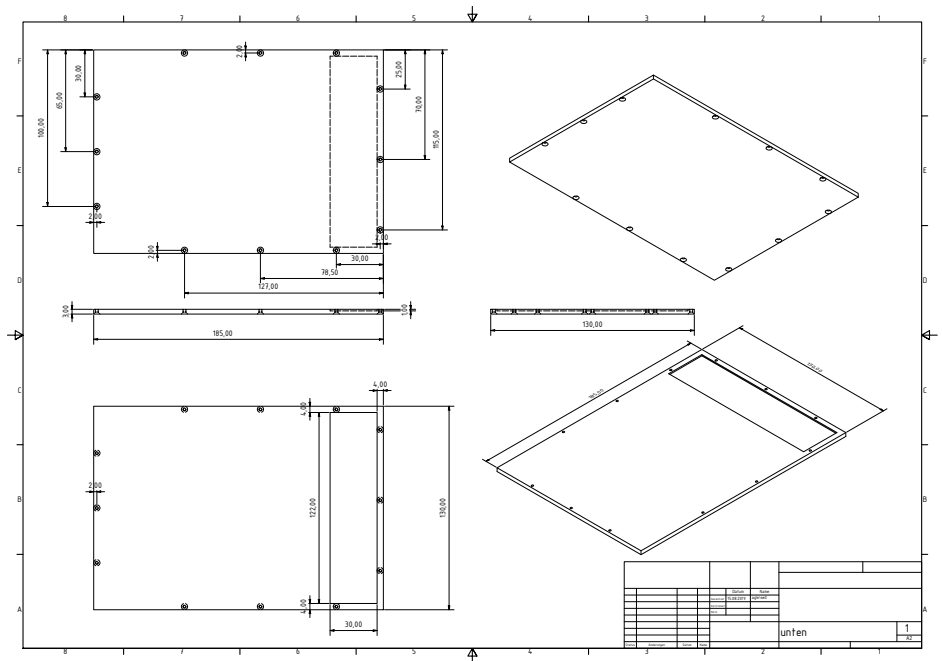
Technical drawing of the bottom plate of a box from the back part of the pair spectrometer.
